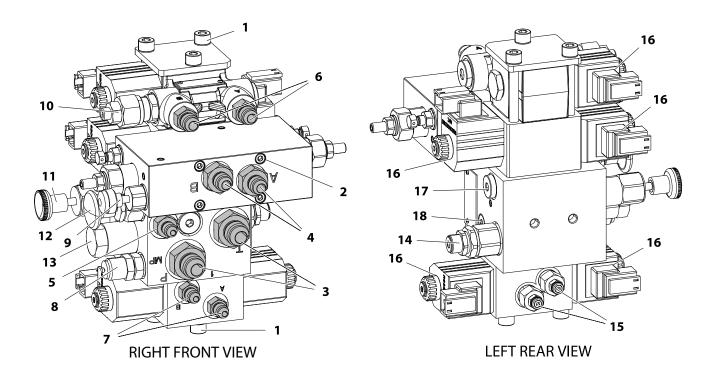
Hydraulic Manifold Assembly - Component Torque
